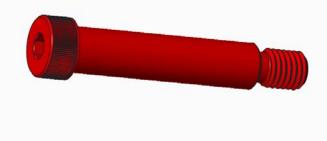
A. Shoulder bolt, 3/4-inch diameter.
